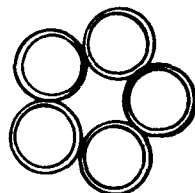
FIVE-HOLE PROBE ASSEMBLED FROM TUBES
